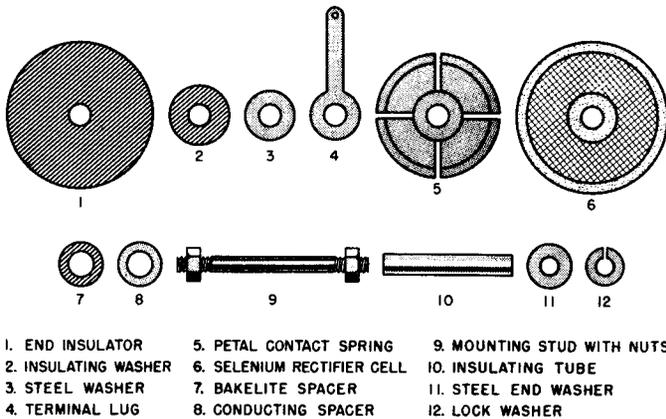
The Elements of a Selenium Rectifier Stack Using the Contact Type Cell.
